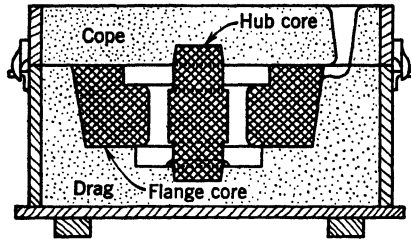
Changing mold production from a three-part mold to a two-part mold with use of cores.
